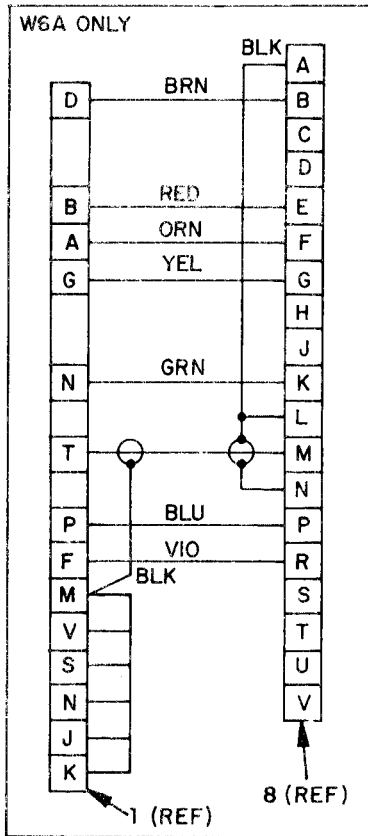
Adapter cable assembly, W6A (467-106-001) W6B (467 -107-001) W7A (467-1.08-001) W7B (467-109-001) W8A (467-110-001) and W8B (467-111-001) (sheet 2 of 2)
